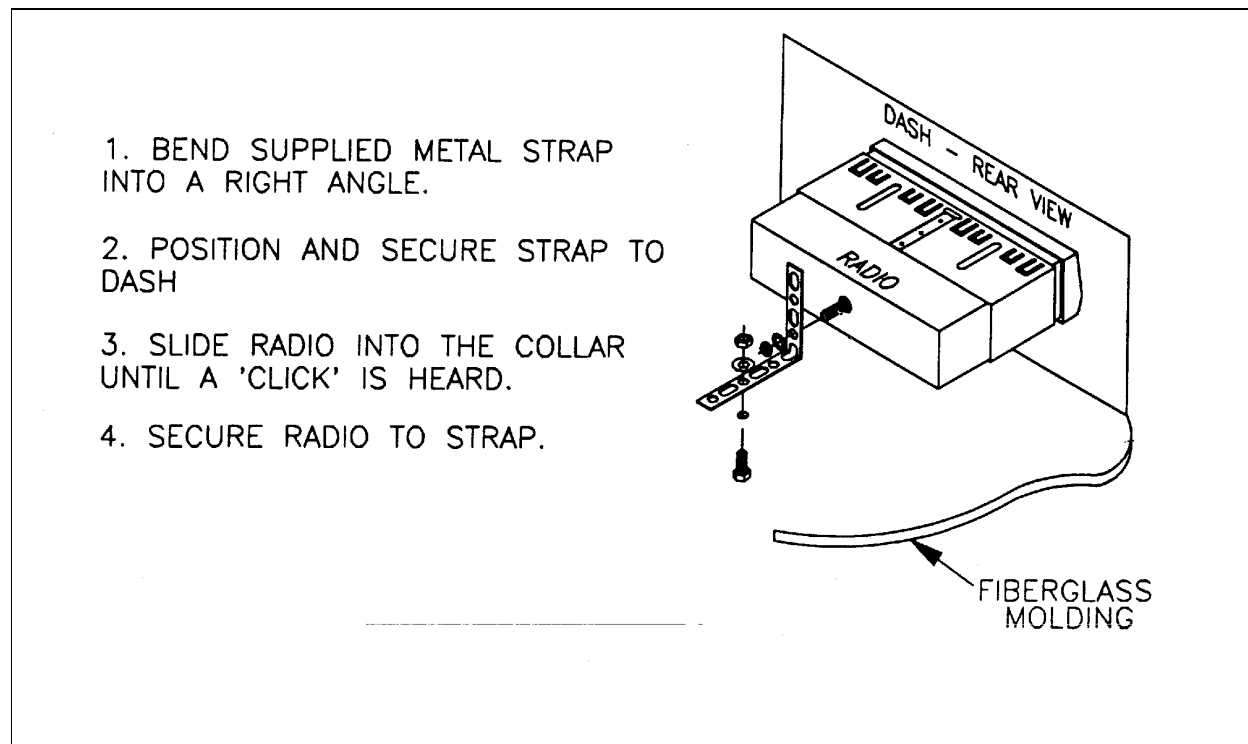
RADIO MOUNTING INSTRUCTIONS
